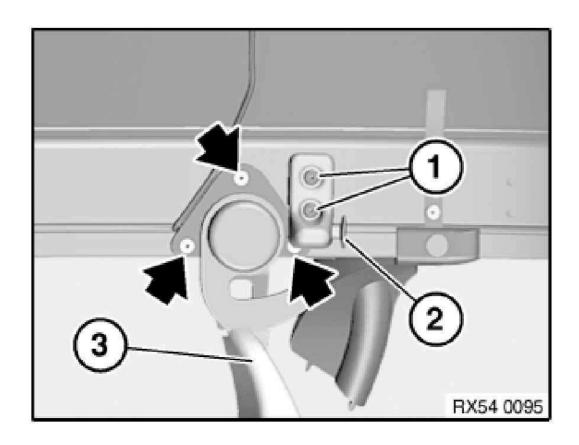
Removing Locking Tension Bar With Joint Courtesy of BMW OF NORTH AMERICA, INC.
